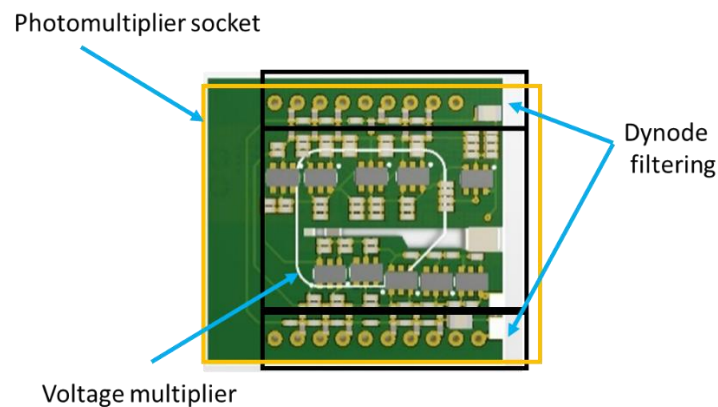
Single board layout following the same design principals (Cockcroft Walton direct circuit) socket side
